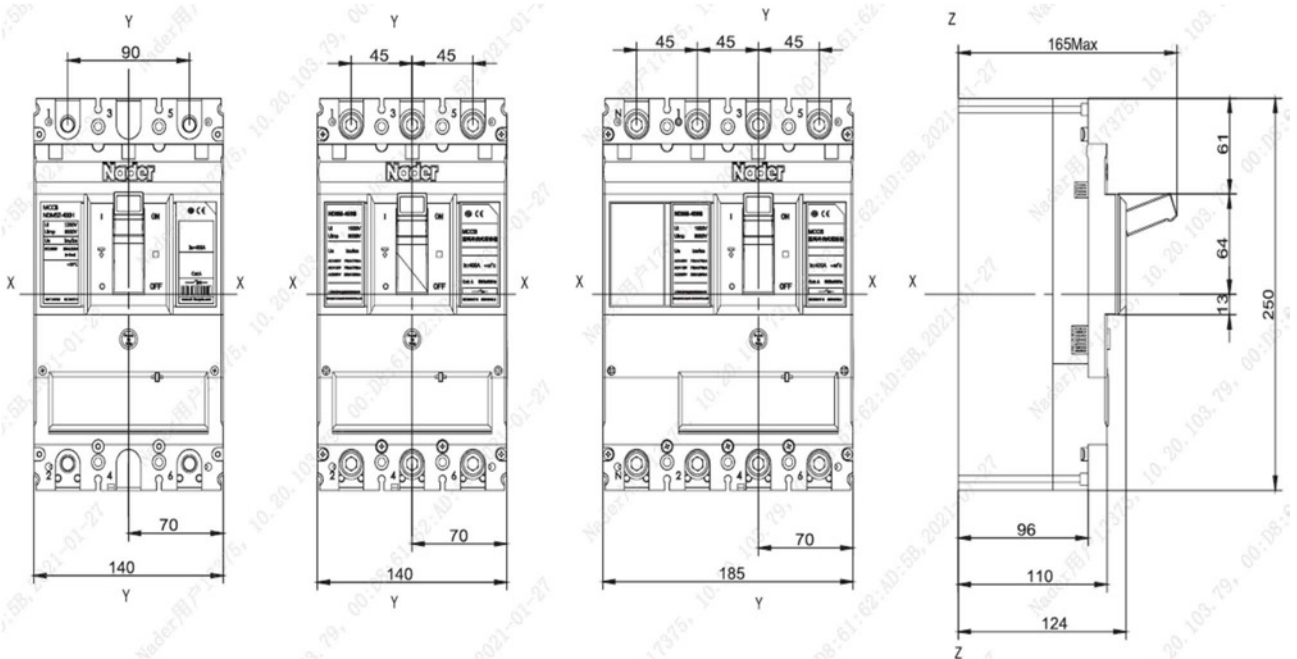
NDM5Z-630 outline dimensions of 2-pole, 3-pole and 4-pole front panel connection products
